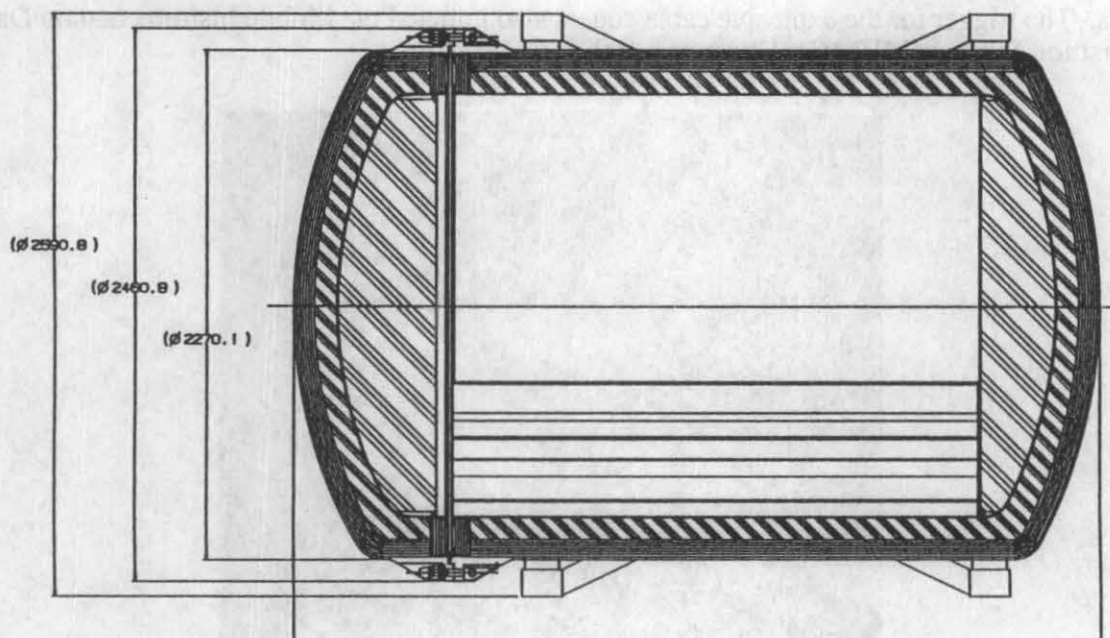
Longitudinal Cross-Sectional View of the On-Site Container
